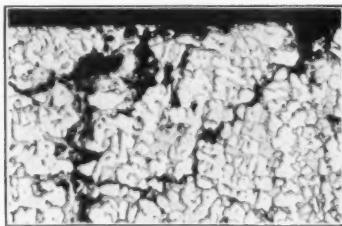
(b) Similar type of copper lead bearing showing characteristic fatigue type of failure. Note the black broken lines indicating fracture. This is typical of fatigue failure after long periods of severe service.
